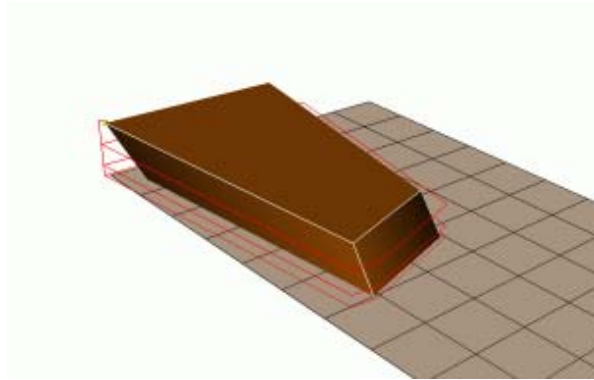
An undercut shape (arrow marked) cannot be milled with a standard 3-axis milling machine.
